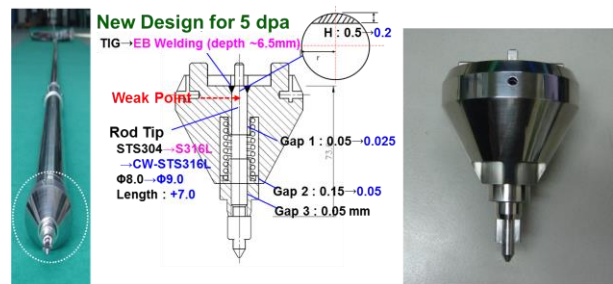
The optimized design of the capsule bottom part for 5 dpa irradiation
